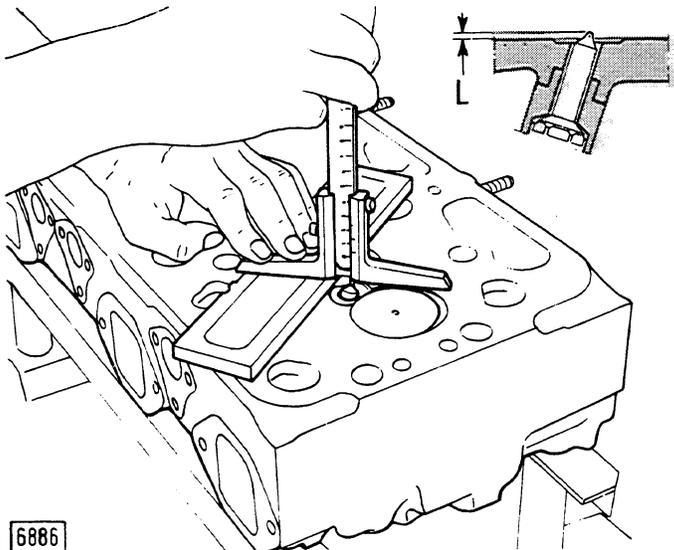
Checking Injector Protrusion from Cylinder Head
